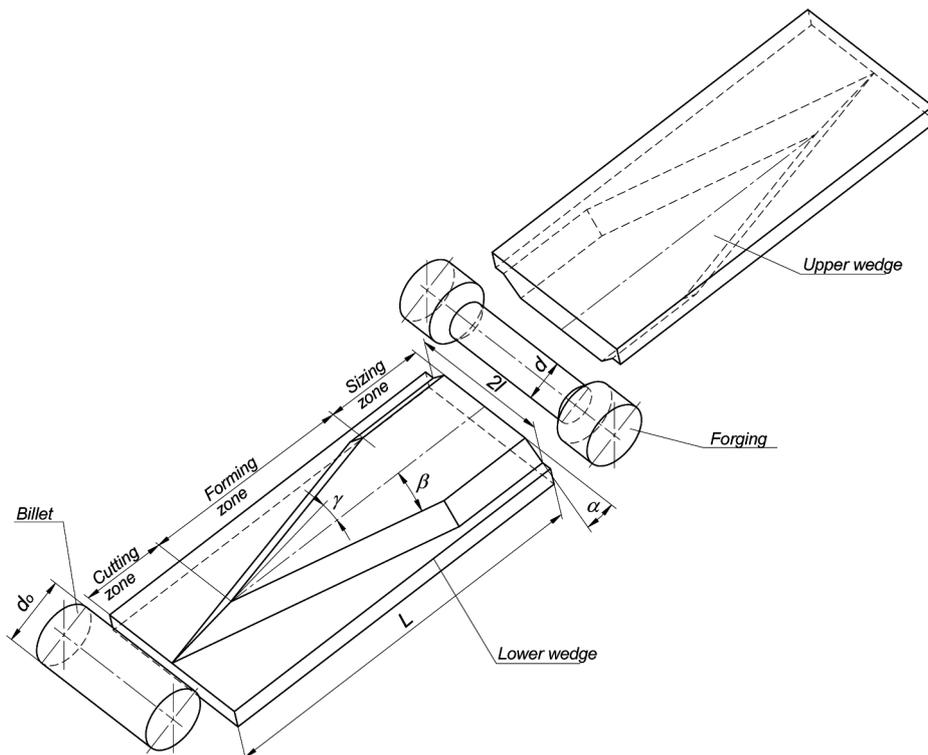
Scheme of the cross wedge rolling process, where the main geometrical parameters of the tools and the rolled forging are marked
